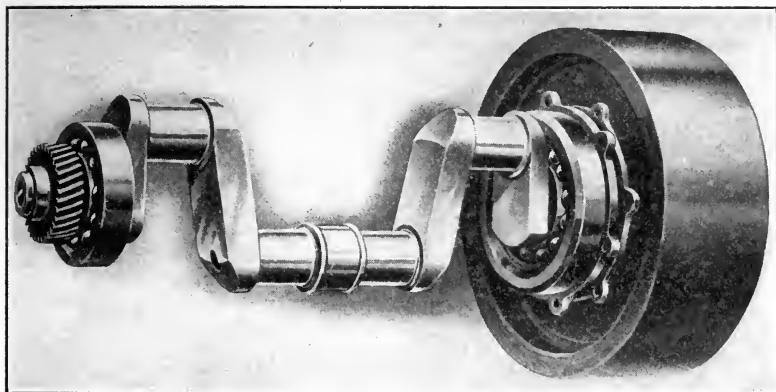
Four-Throw, Two-Bearing Chalmers Crank Shaft Mounted on Anti-Friction Journals of the Ball-Bearing Type.
